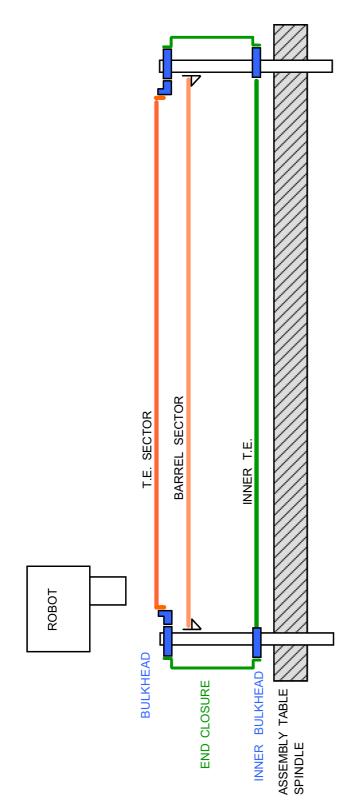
Schematic longitudinal view of the sector showing the bulkheads and end closure for the thermal shield.
